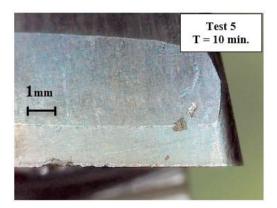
Localized chipping of the tool for trochoidal milling tests.
